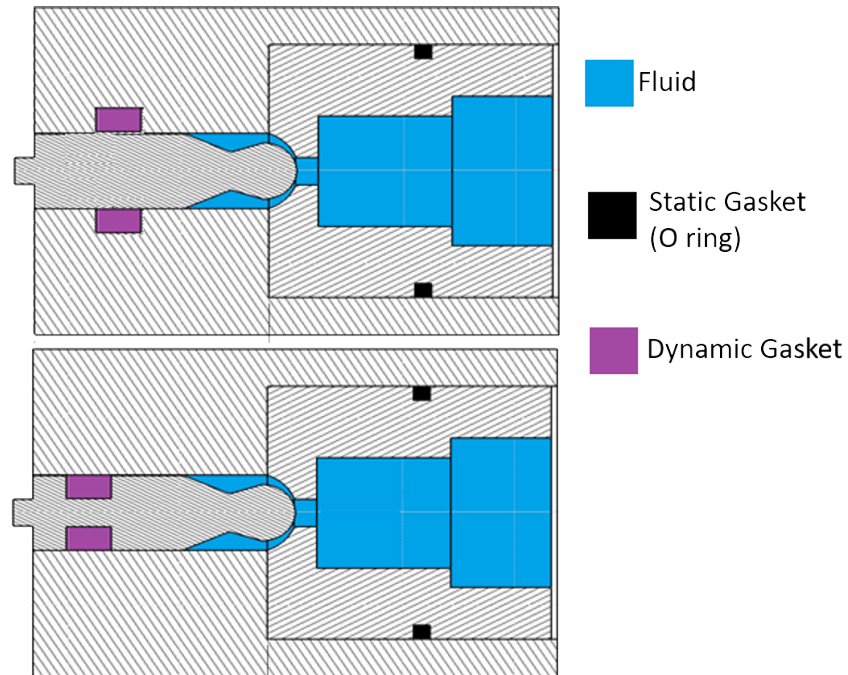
Gasket position options(Upper:Rod Type, Lower:Piston Type)
